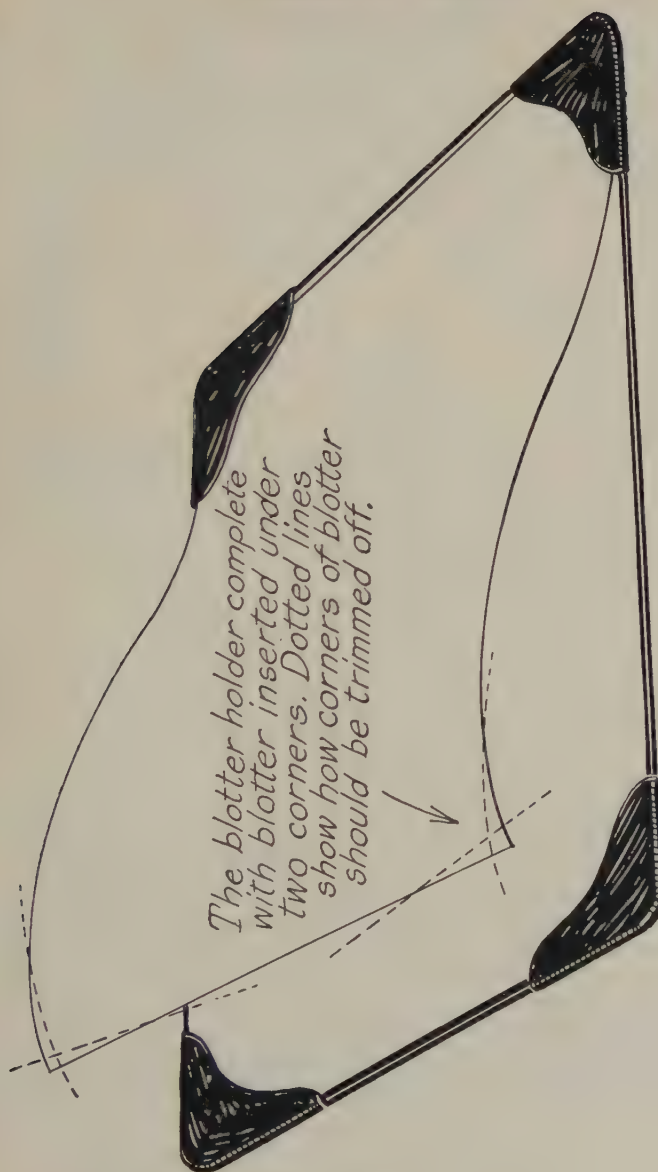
COMPLETED DESK PAD, WITH DIAGRAM SHOWING PROPER METHOD OF CUTTING BLOTTER SHEET CORNERS
